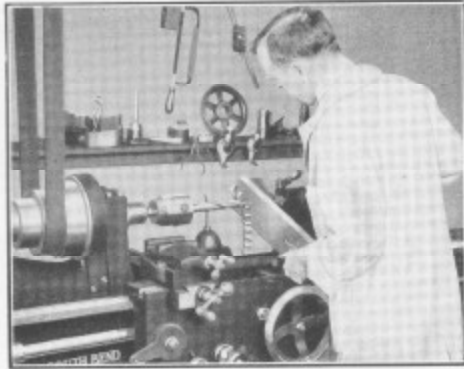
Drilling a Steel Bar Held Against Drill Pad in Tailstock
